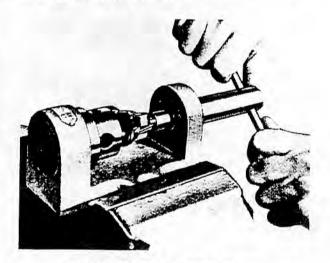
REAMING ROCKER BUSHES REAMER AND ADAPTOR MF125. FIXTURE No. 6100
